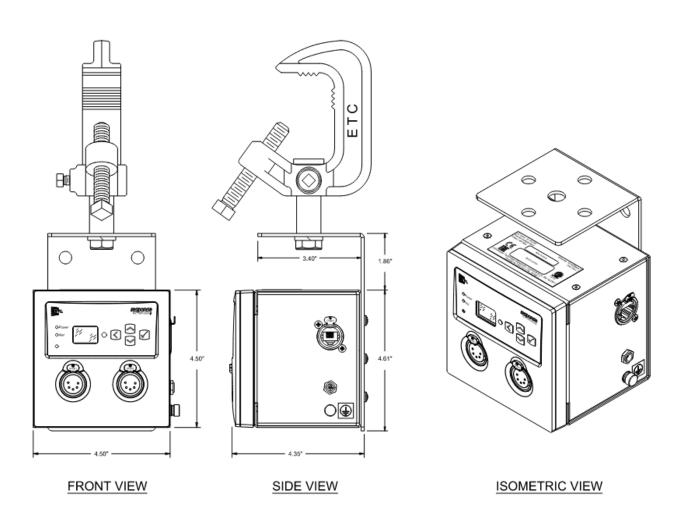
DIN elevation drawings with unit labels)
